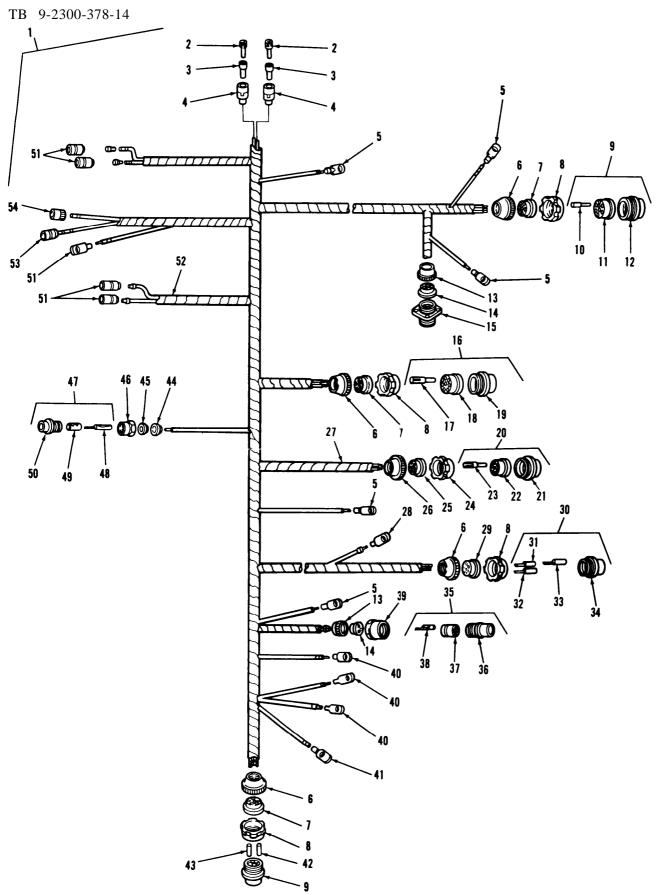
FRONT MASTER CONTROL HARNESS ASSEMBLY (2CA ENGINE).
